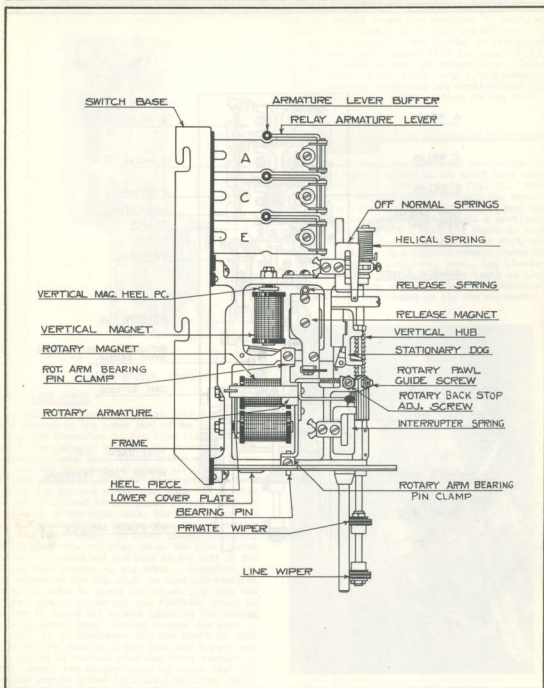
SELECTOR SWITCH, LEFT VIEW
